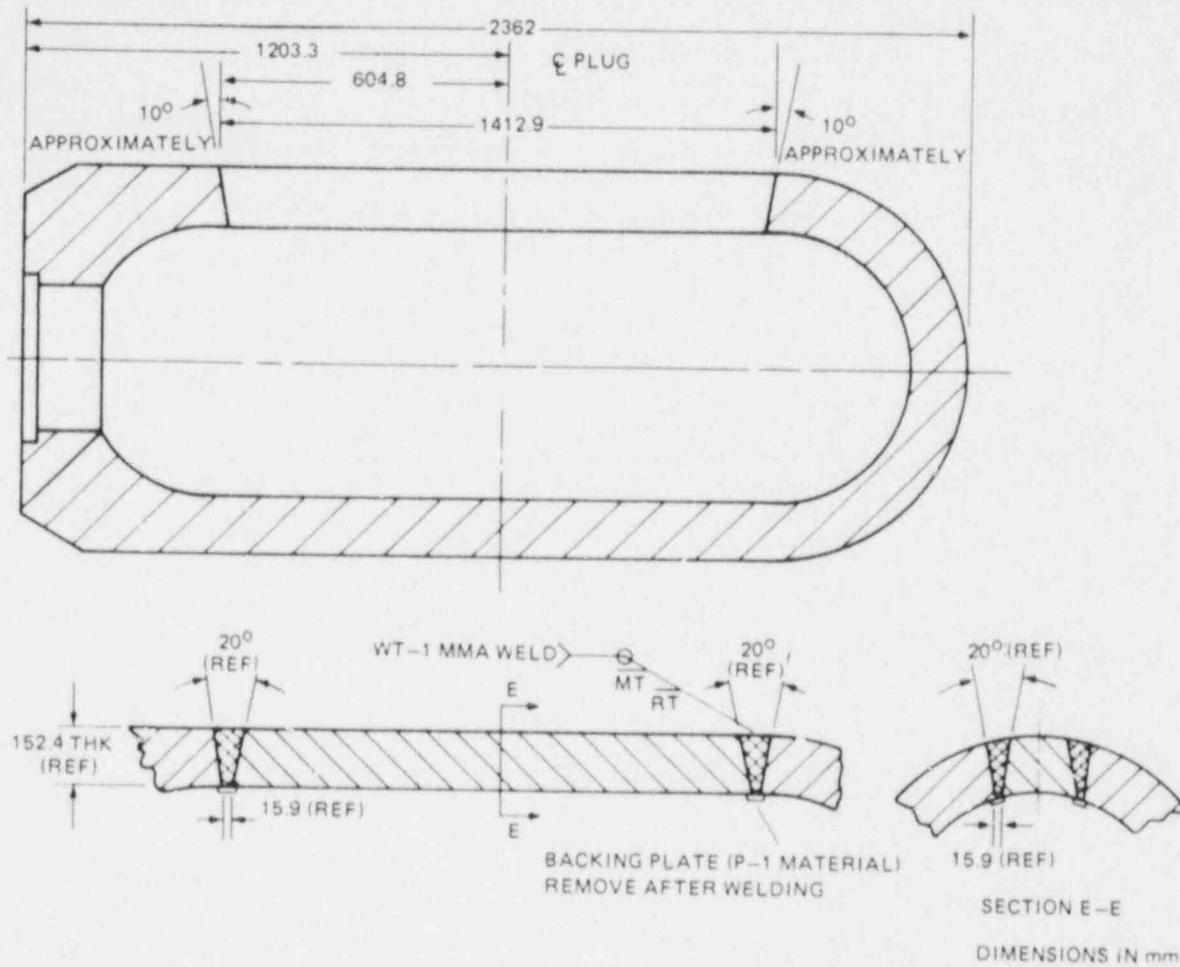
Plug insert welds in vessel V-8.
